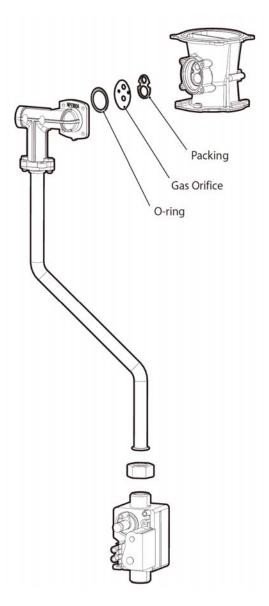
Exploded View of Gas Pipe Assembly (NCB-40LSWE)
